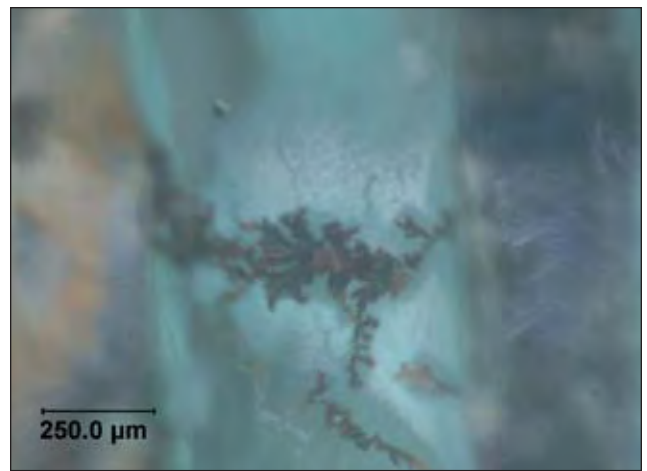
Pitting corrosion observed along the component leads.
